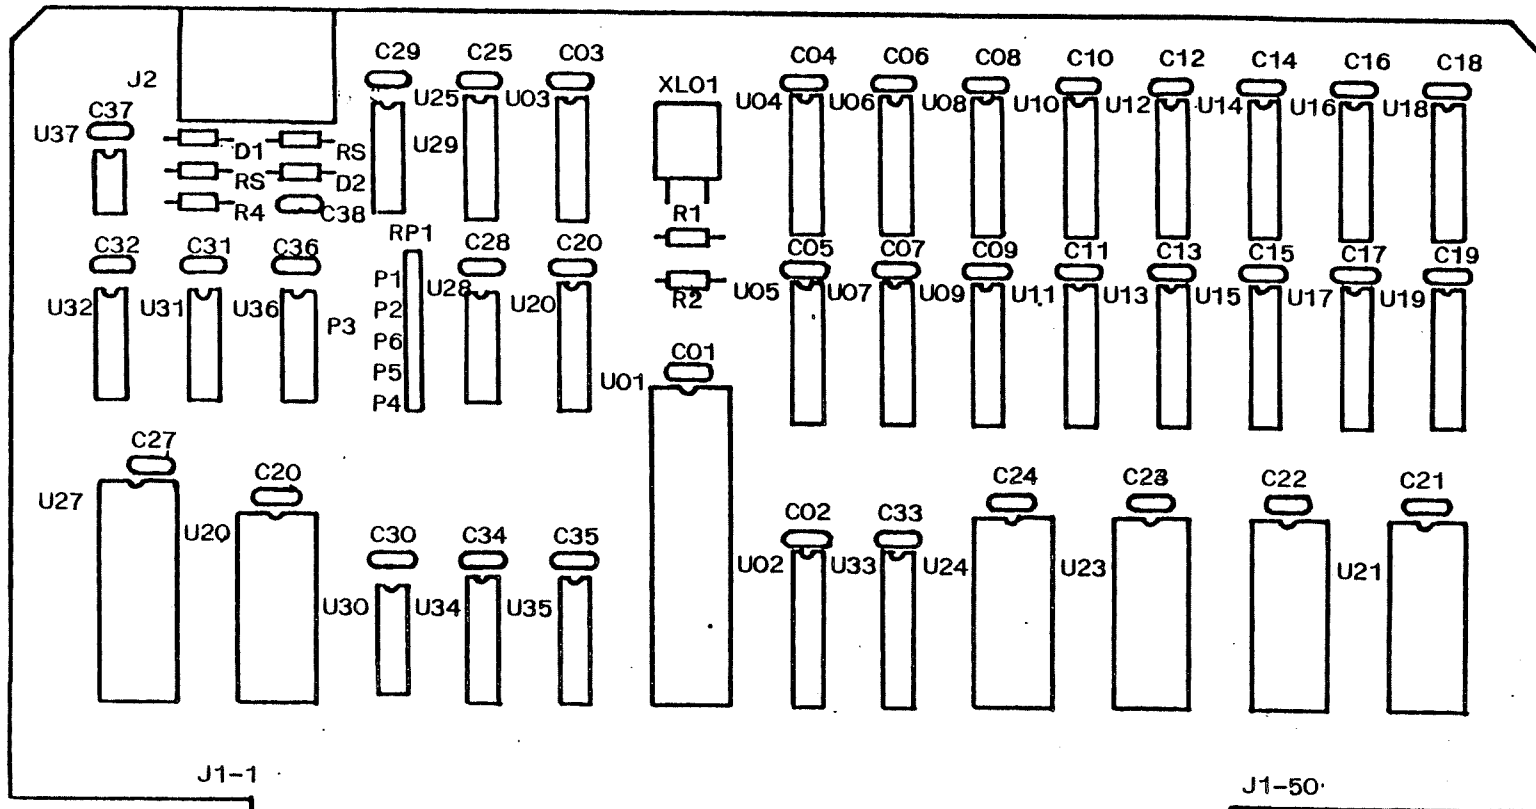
The Printed Wiring Assembly of the CPU Board
